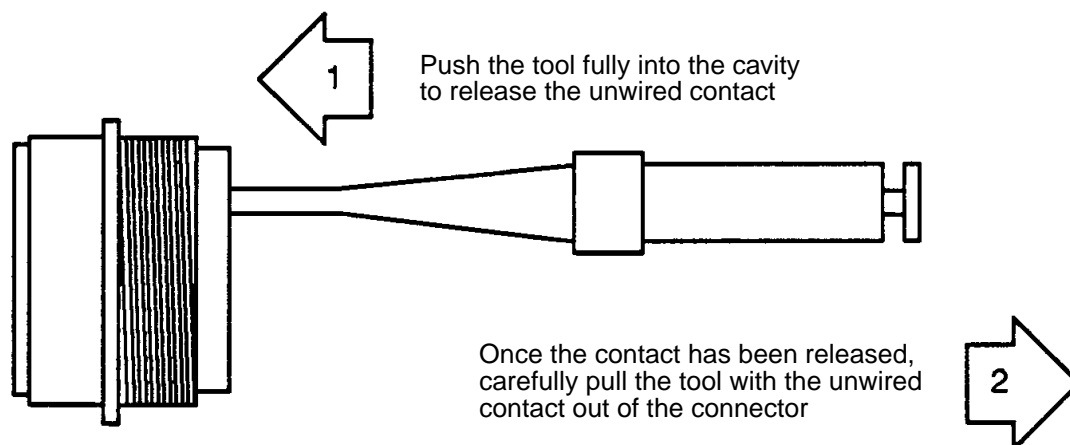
Use of MS3448 Extraction Tool for Unwired Contacts
